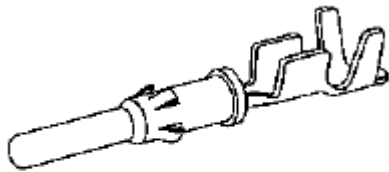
Identifying Round Plug Contact (RK)-2.5 Solder Female Contact
